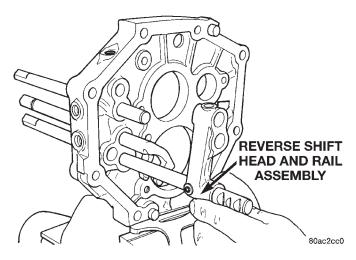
Remove Reverse Shift Head And Rail Assembly
